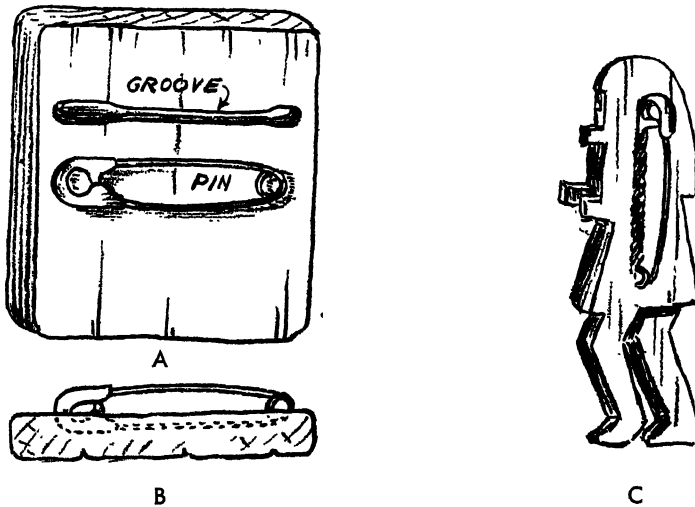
A, Attaching the safety pin to the block; B, setting the pin into the groove; C, fastening pin in a long design
